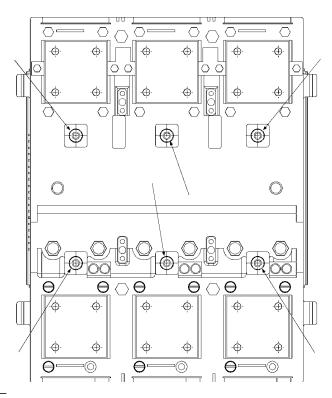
Locations of the $^3/_8$ -16 x $^7/_{16}$ -inch deep screw inserts for mounting the switch in equipment, 2500–3000 A back-connected frames
